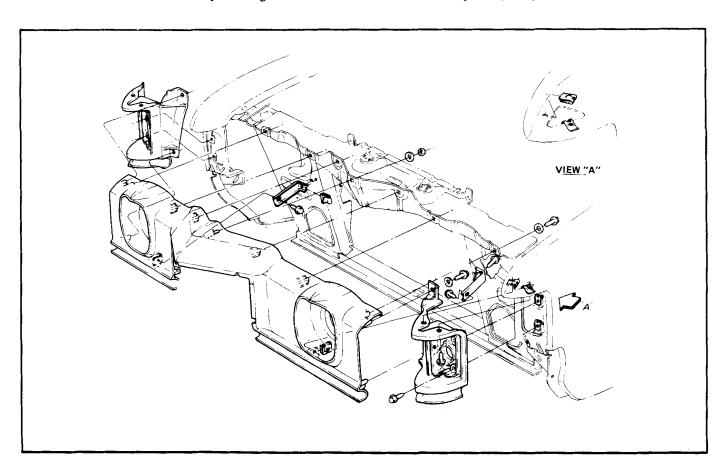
G Series Headlamp Filler Panel and Front Fender Extensions
